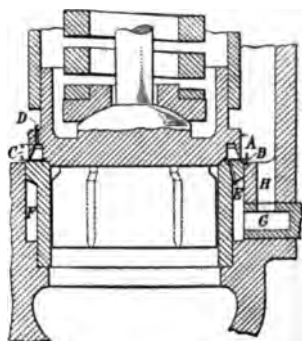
LATER TYPE OF VALVE WITH ADJUSTABLE BLOW-DOWN
